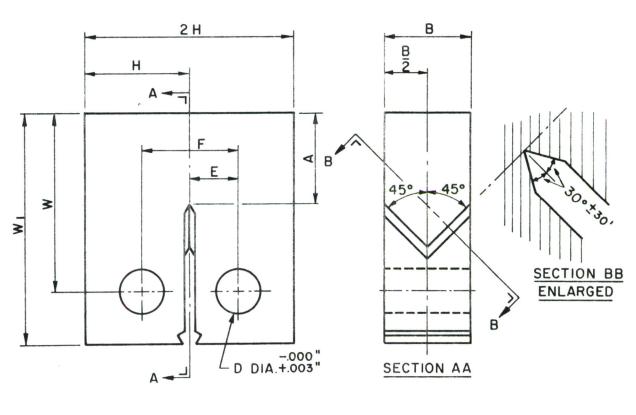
Notch-Bend Fracture-Toughness Specimen.
